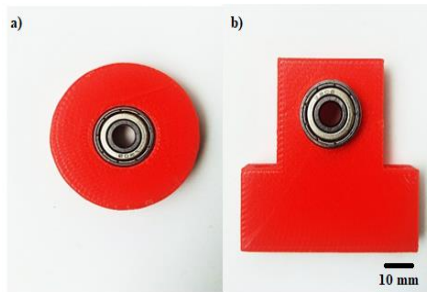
Customized 3D printed parts; pulley (a) and bracket (b) fitted with bearings.
